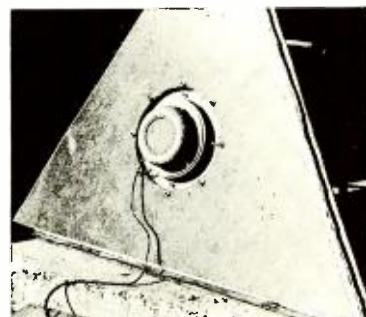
Rear view of speaker mounting to show use of mounting ring.
